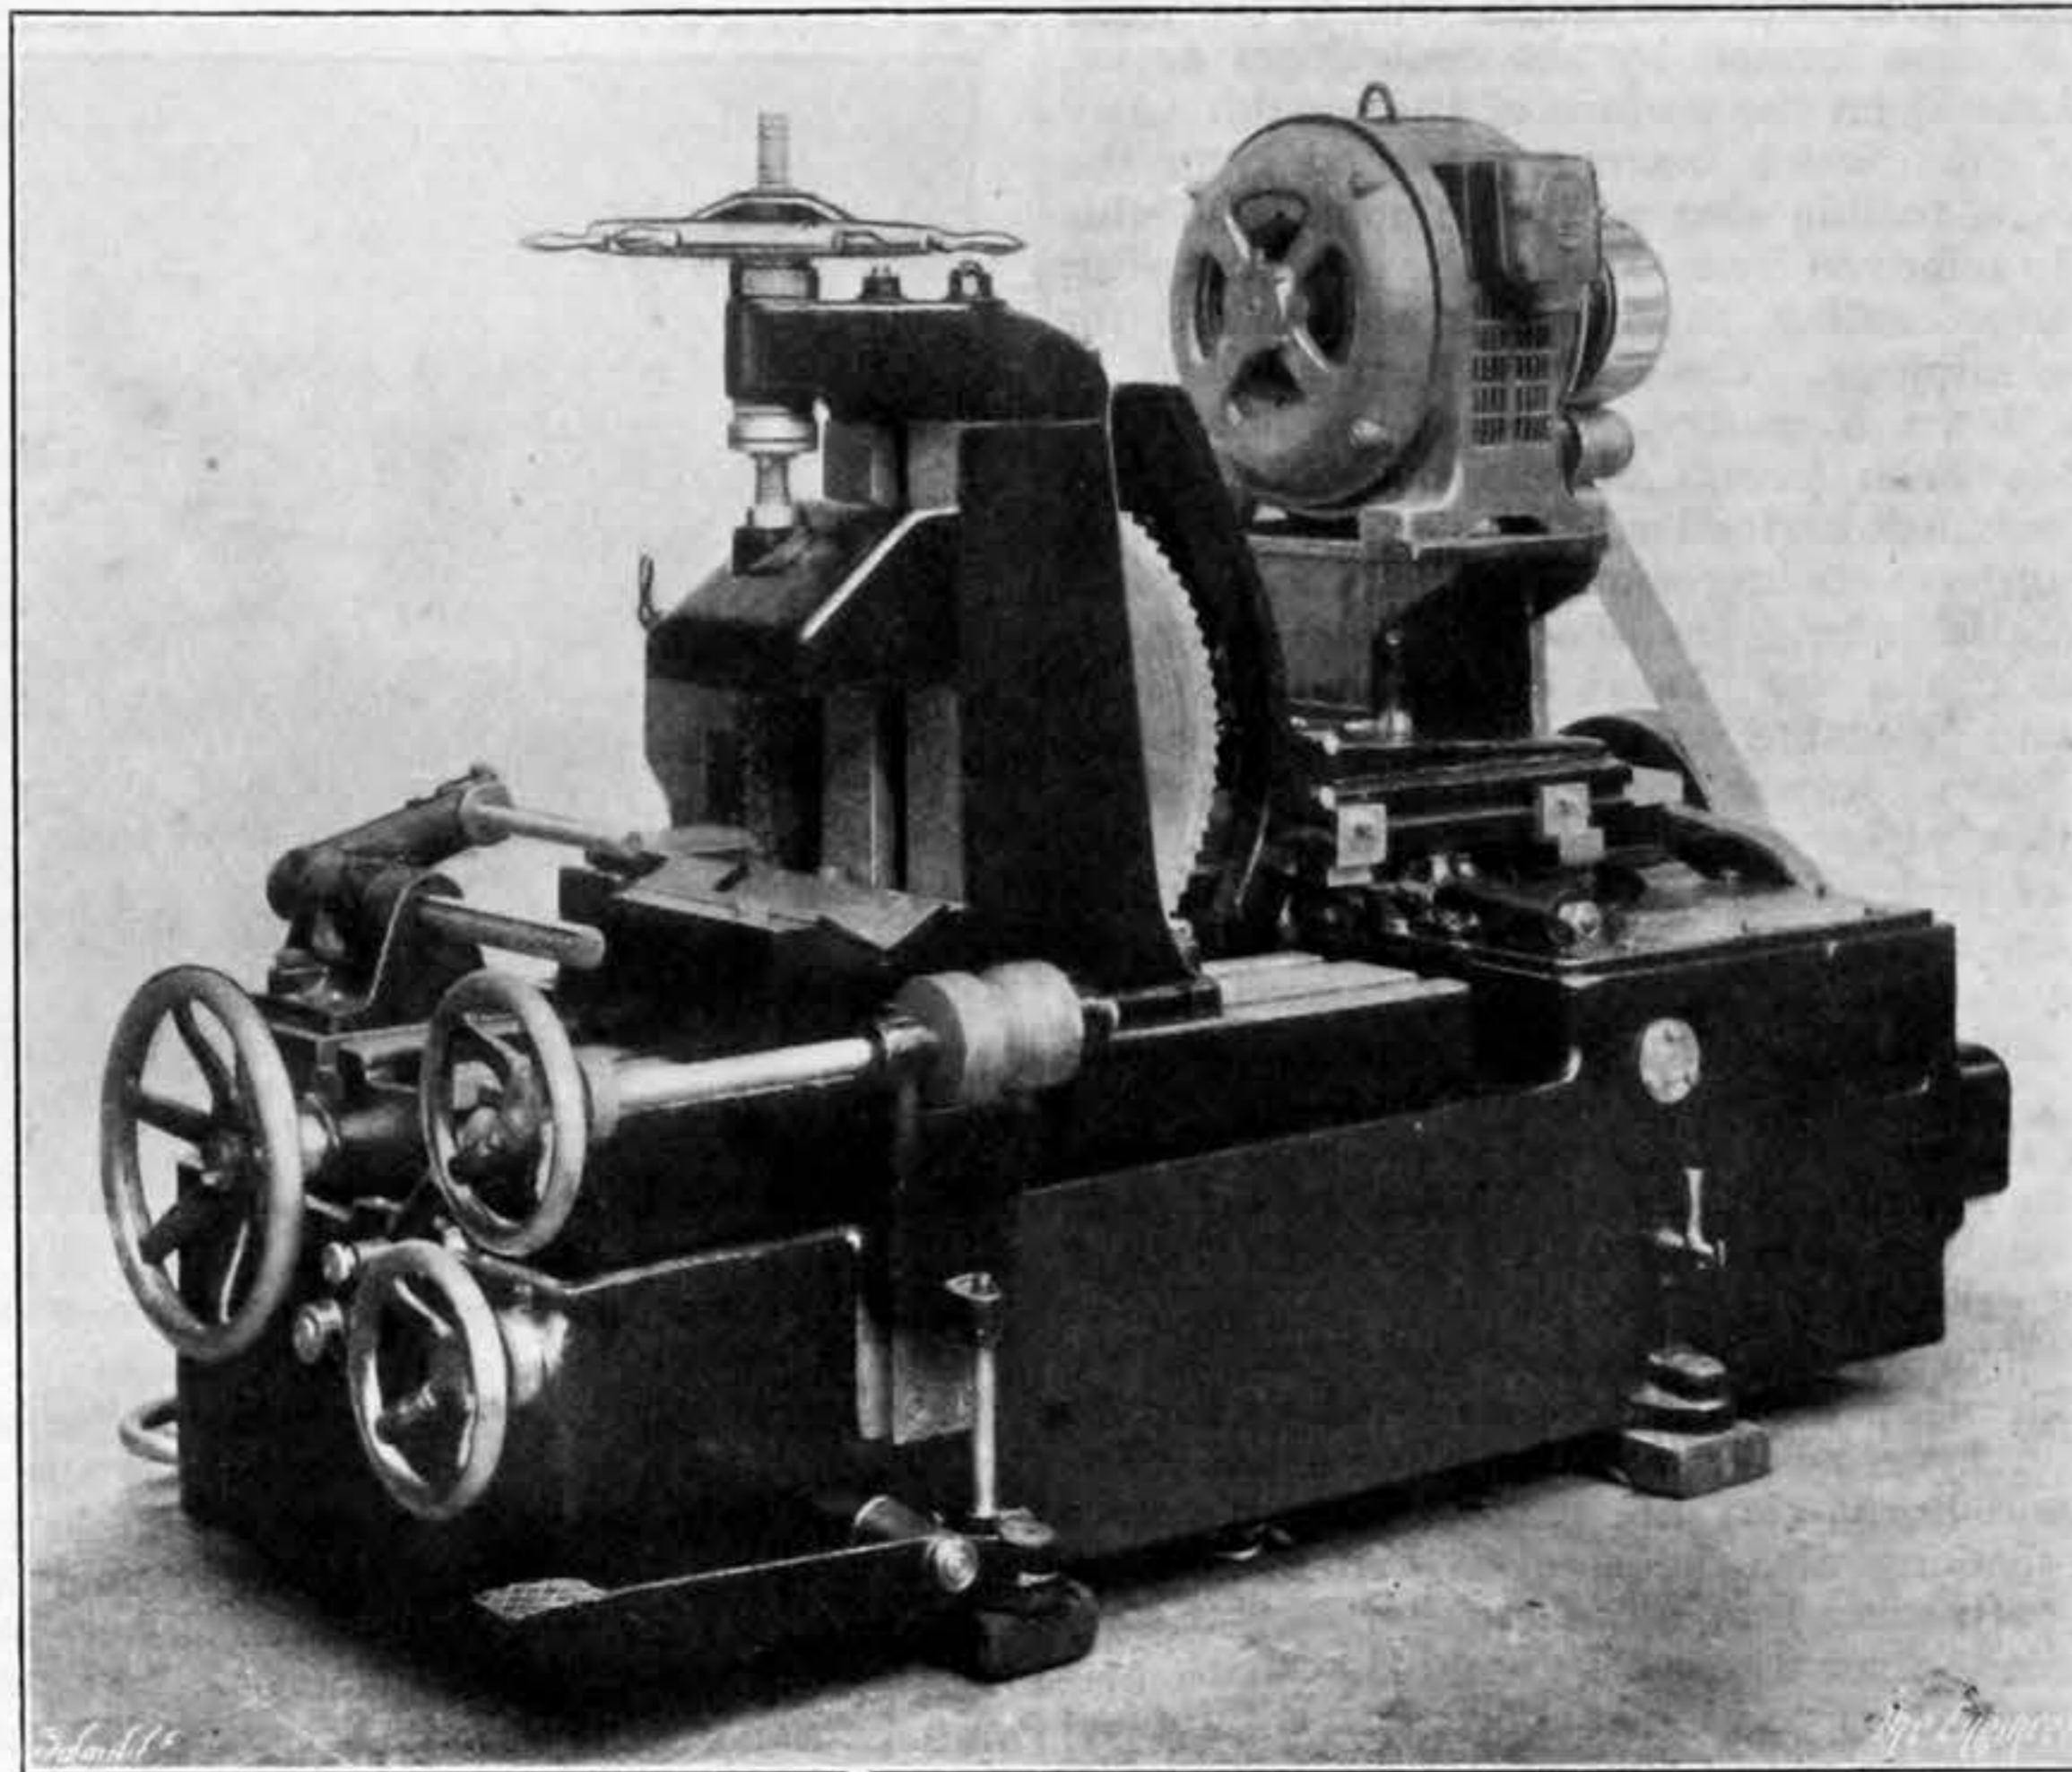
HIGH-SPEED COLD SAWING MACHINE—CLIFTON AND BAIRD
